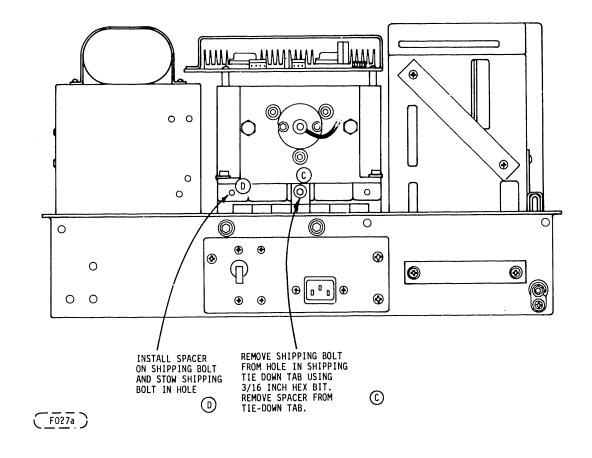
REAR SHIPPING BOLT LOCATION
